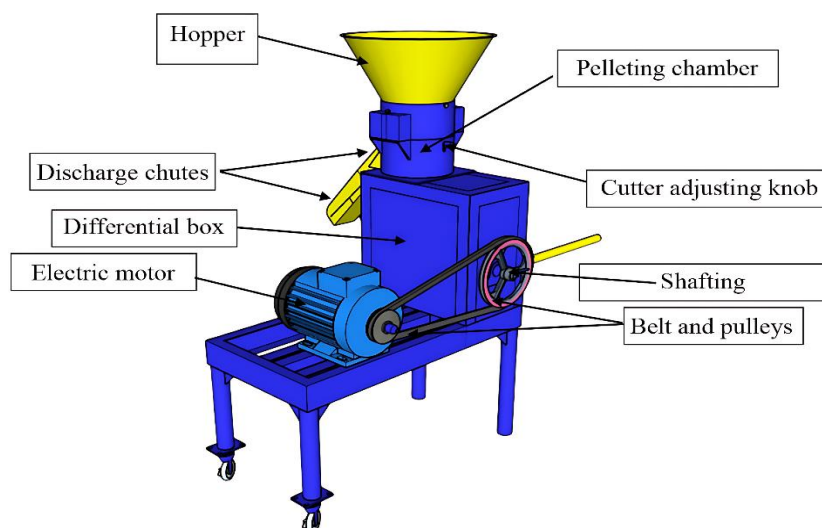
Isometric view of the developed chicken manure pelleting machine.
